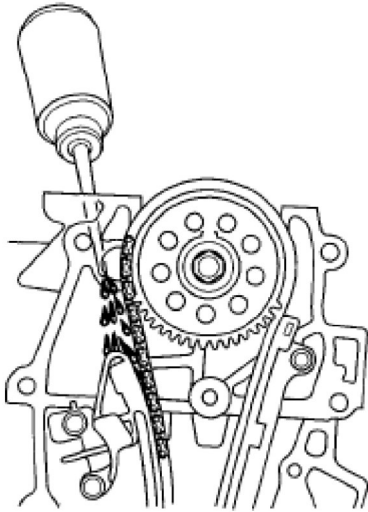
Applying Engine Oil To Sliding Surface Of Cam Chain Tensioner Through Oil Return Hole In Cylinder Head
